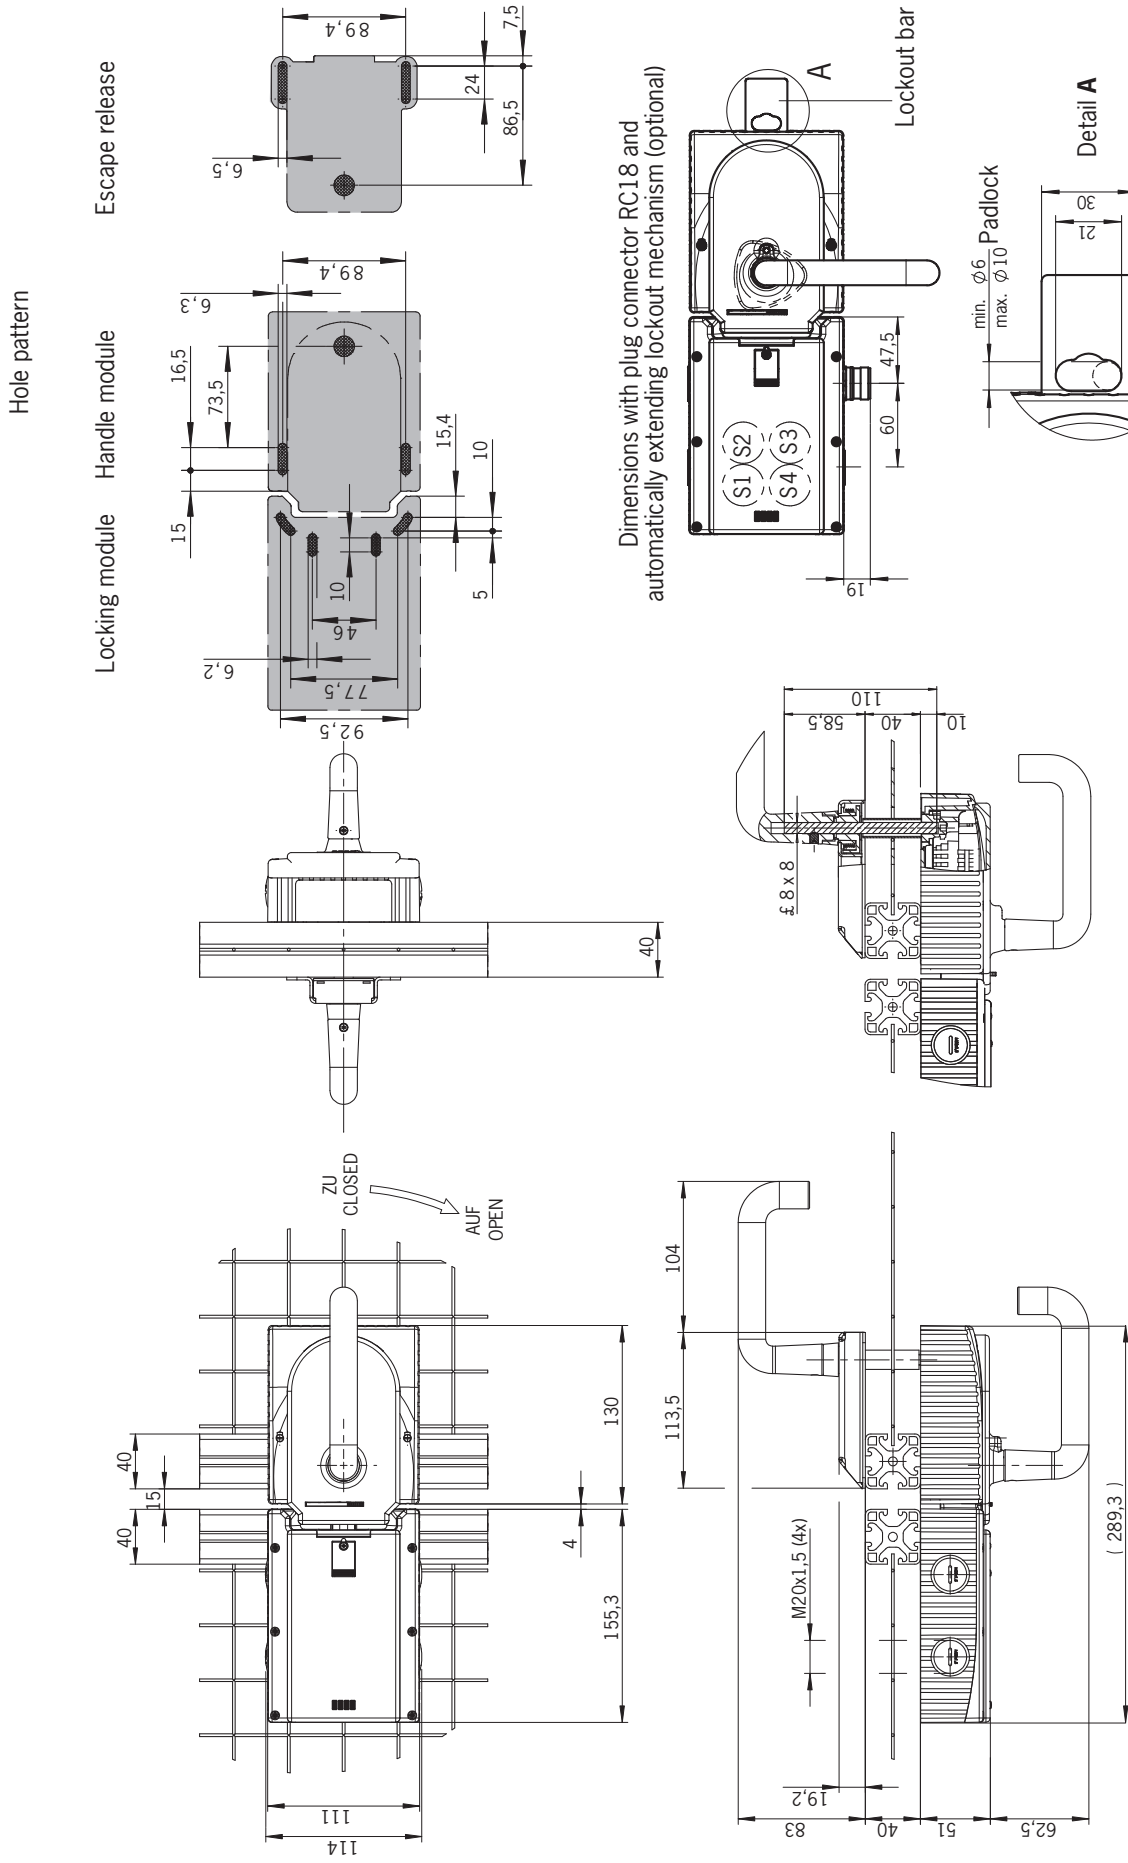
Dimension drawing MGB fitted, without optional mounting plates
